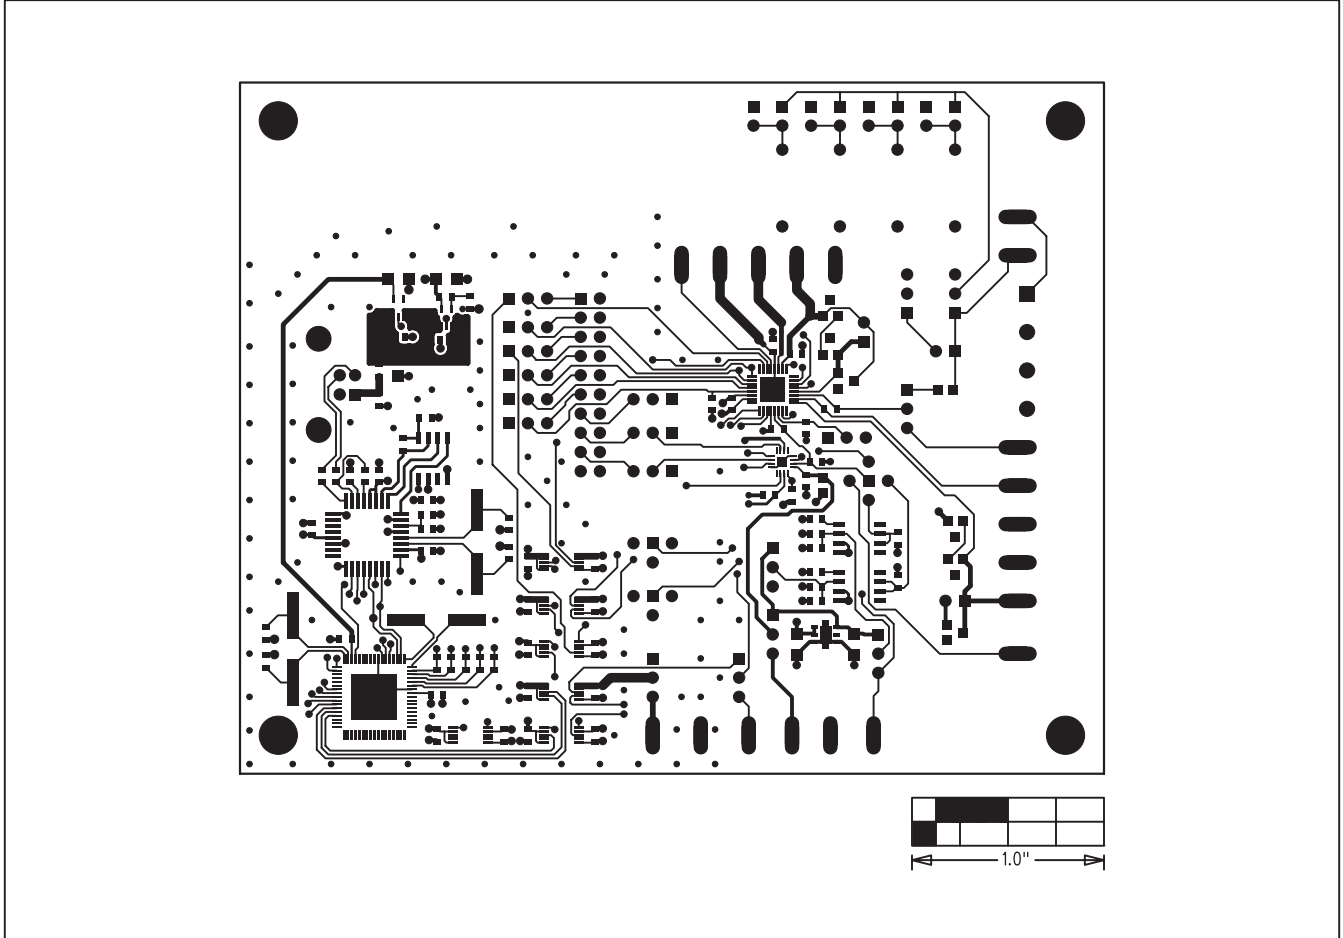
MAX15501 EV Kit PCB Layout—Component Side
